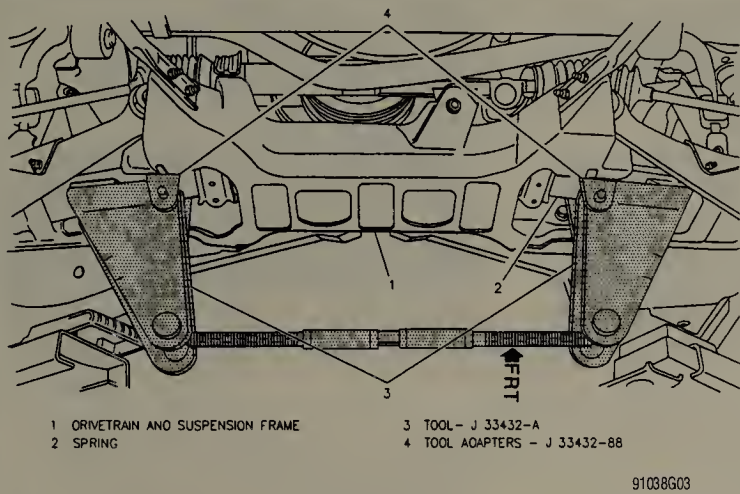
You must install special tools to safely compress and remove the transverse spring
